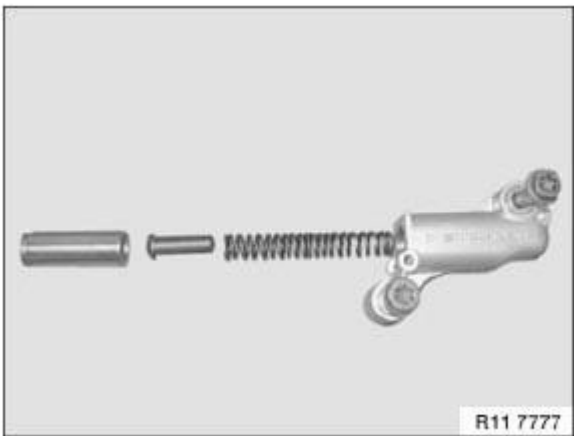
Identifying Chain Tensioner Piston, Spring And Housing
